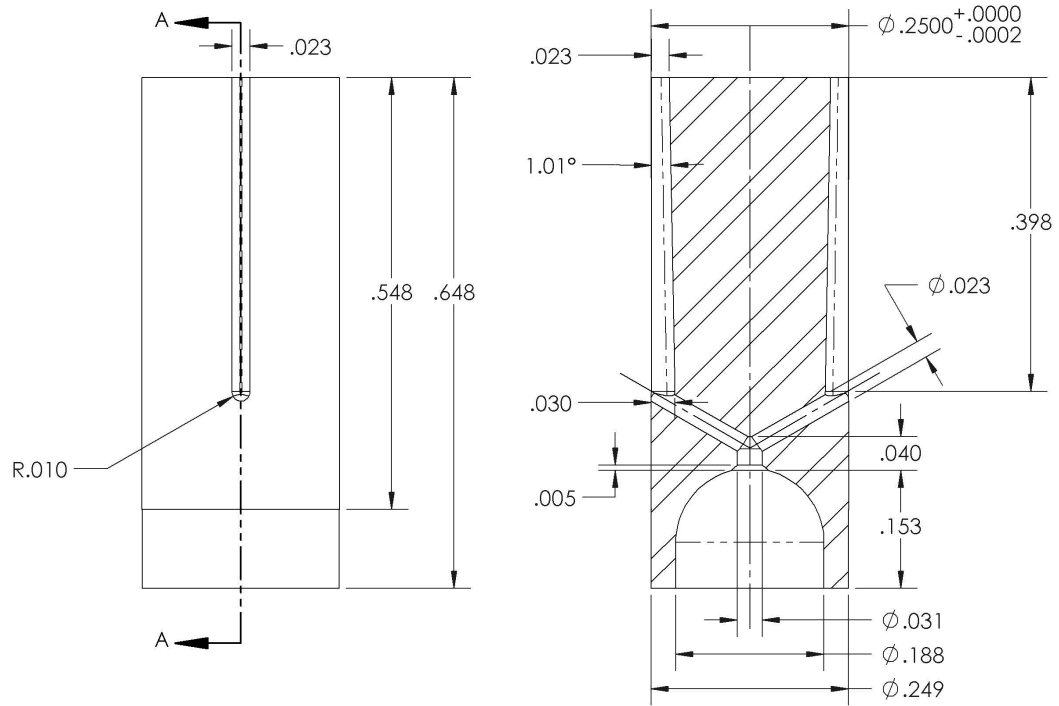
Final thermocouple plug design drawing with section view showing internal features.
